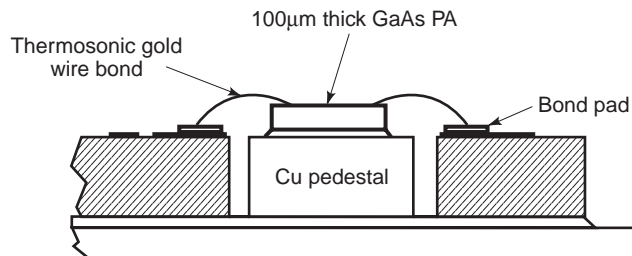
A typical packaging method for GaAs power amplifier chips using die bond to heatsink and gold–gold wire bond. The heat sink connected to the copper (Cu) pedestal is used to extract heat divergently through the back of the power amplifier. (From Ref. 42, © IEEE 1989, reprinted with permission.)
